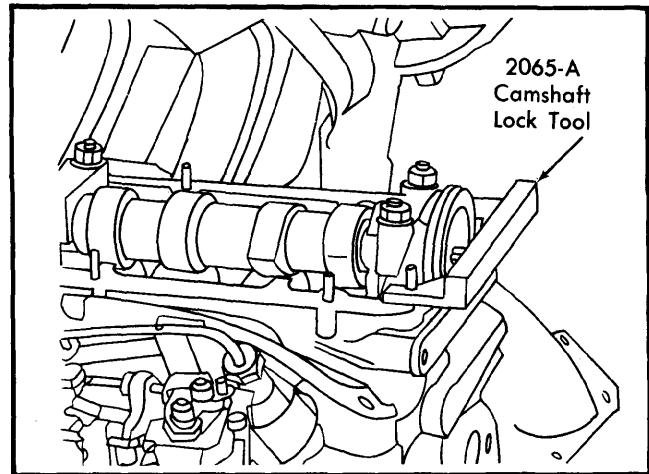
Camshaft Locking Tool Installation (Volkswagen Shown)
